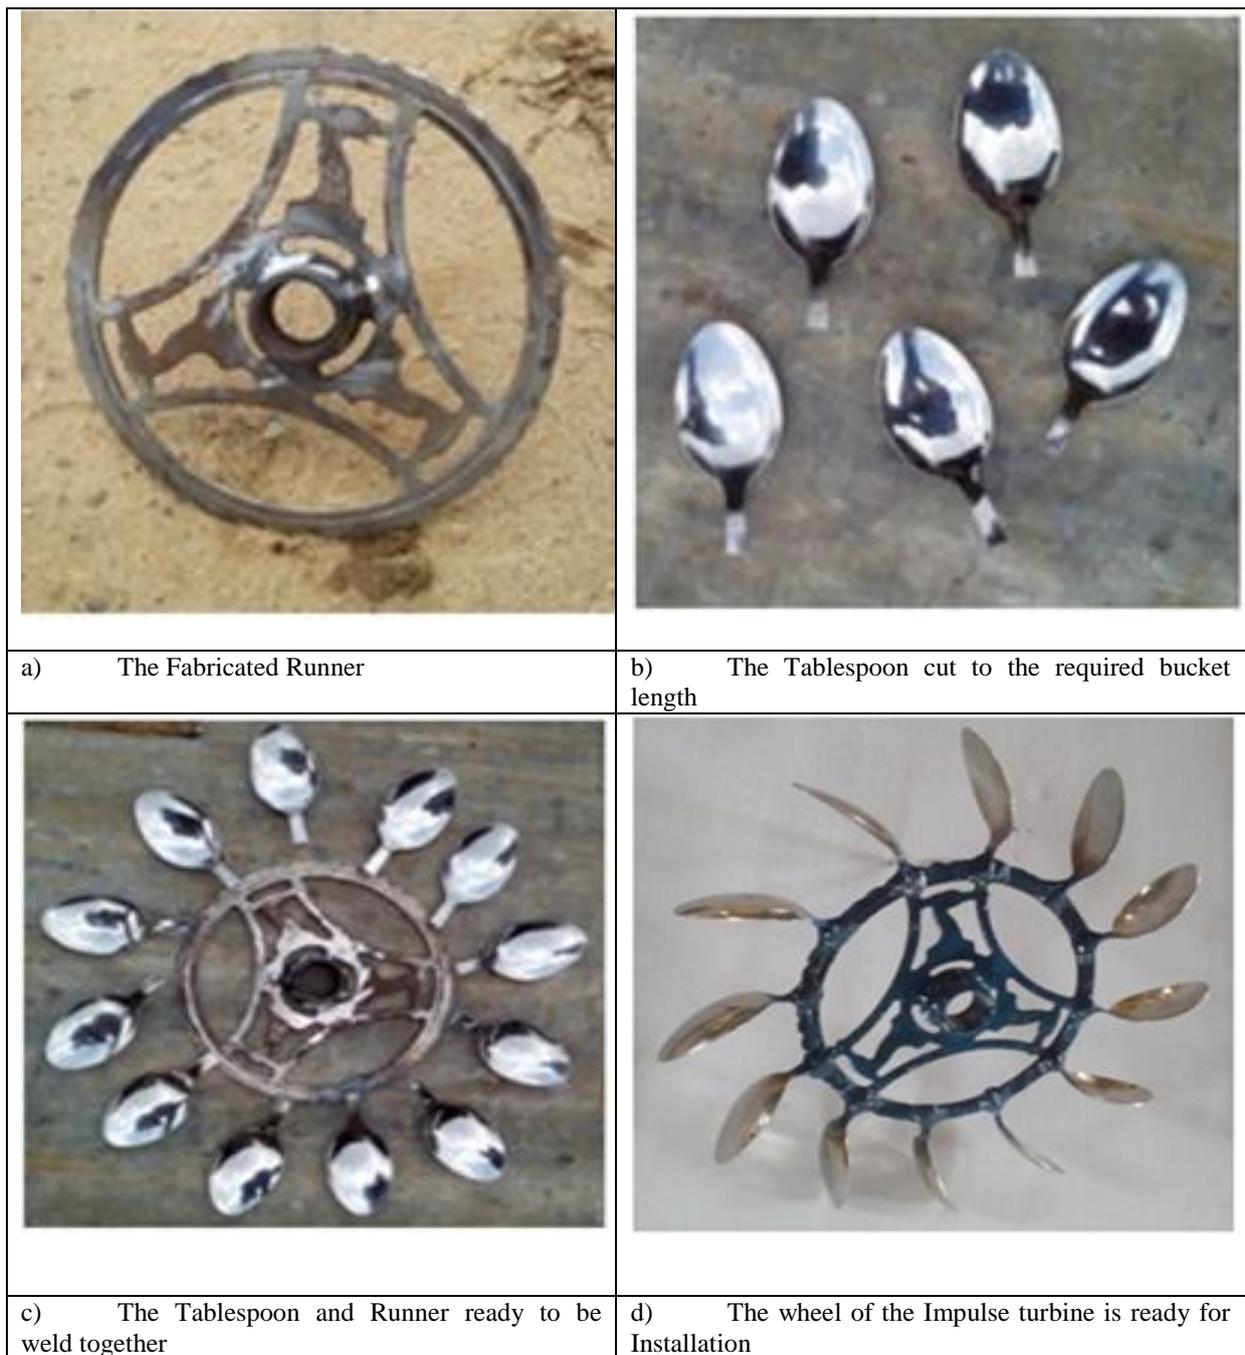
Fabrication of the Runner and the Tablespoon buckets
